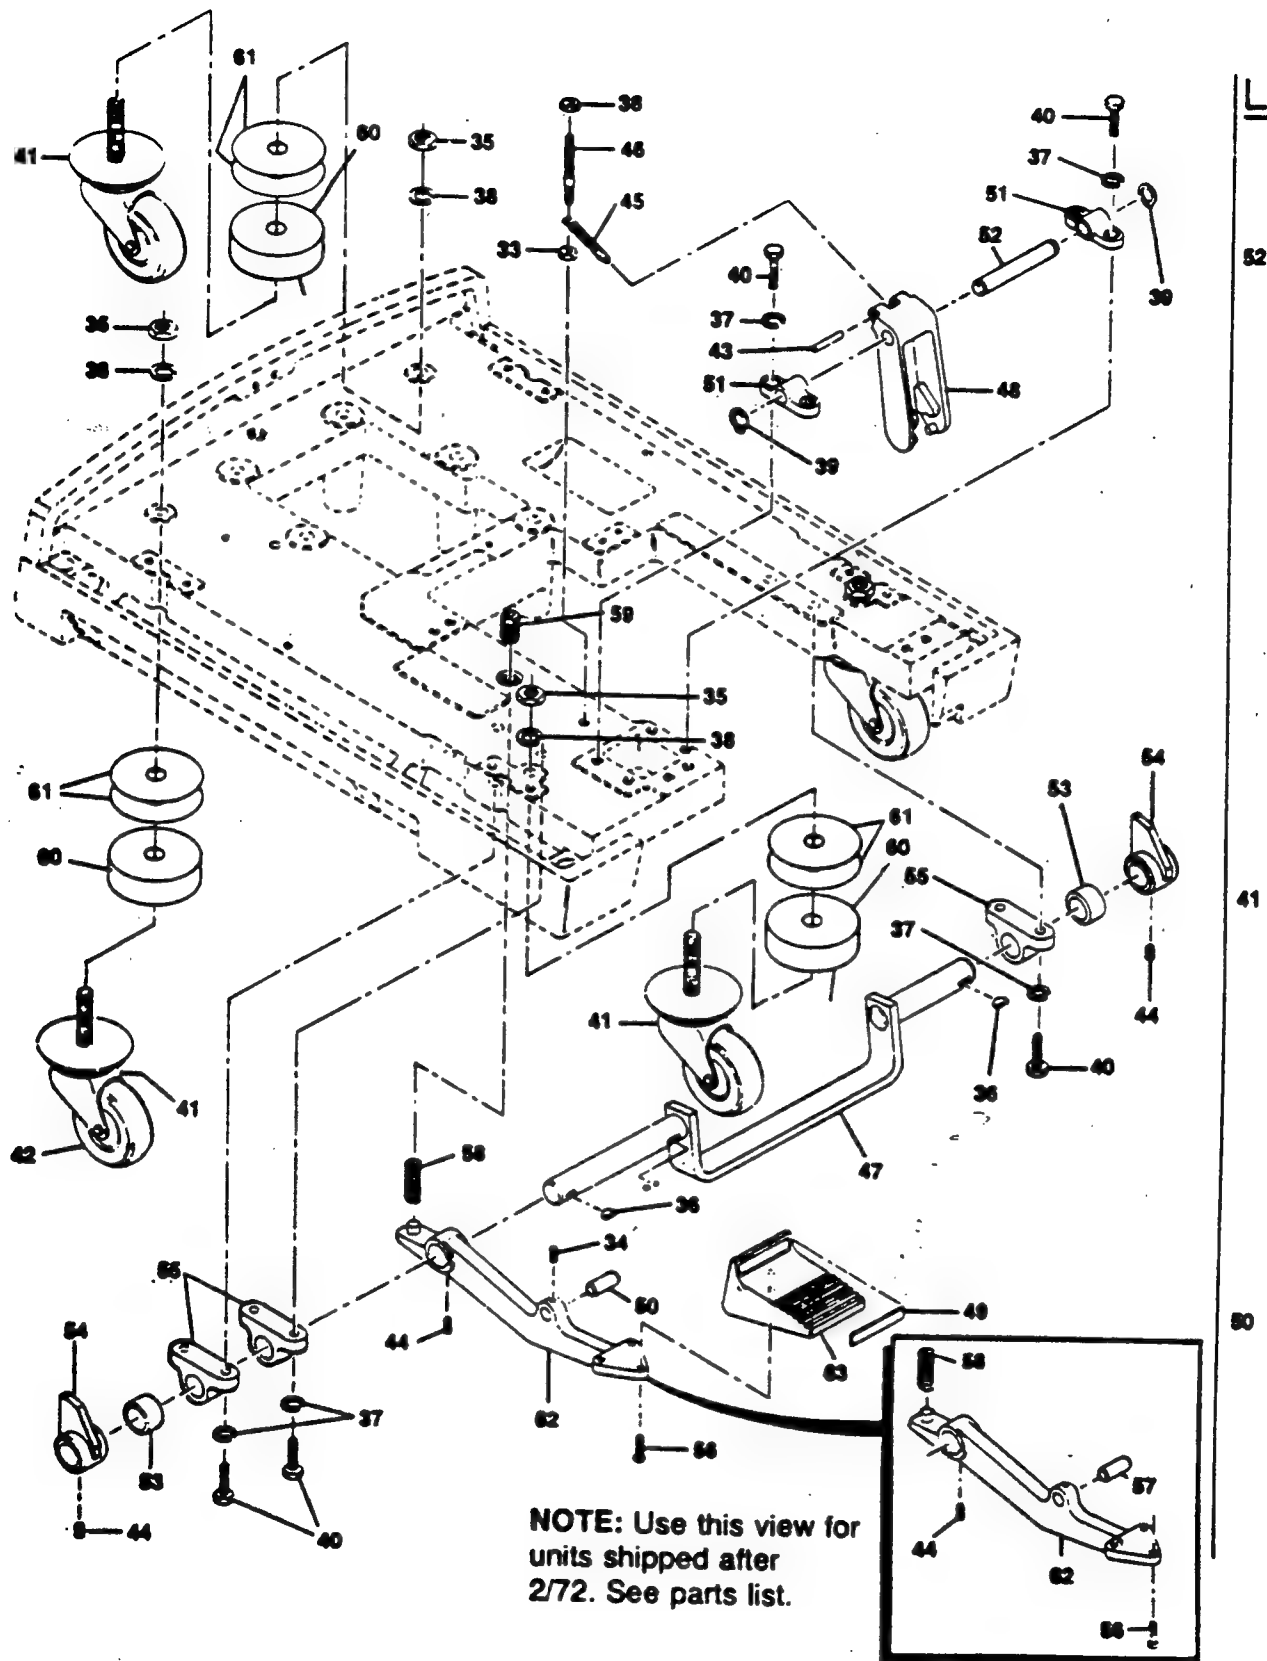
FLOOR LOCK ASSEMBLY (Sheet 2 of 2)
